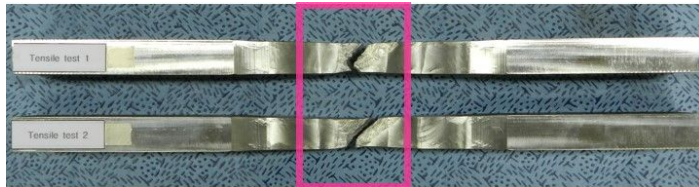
Fractured specimen after High Mn steel tensile test (19mm)
